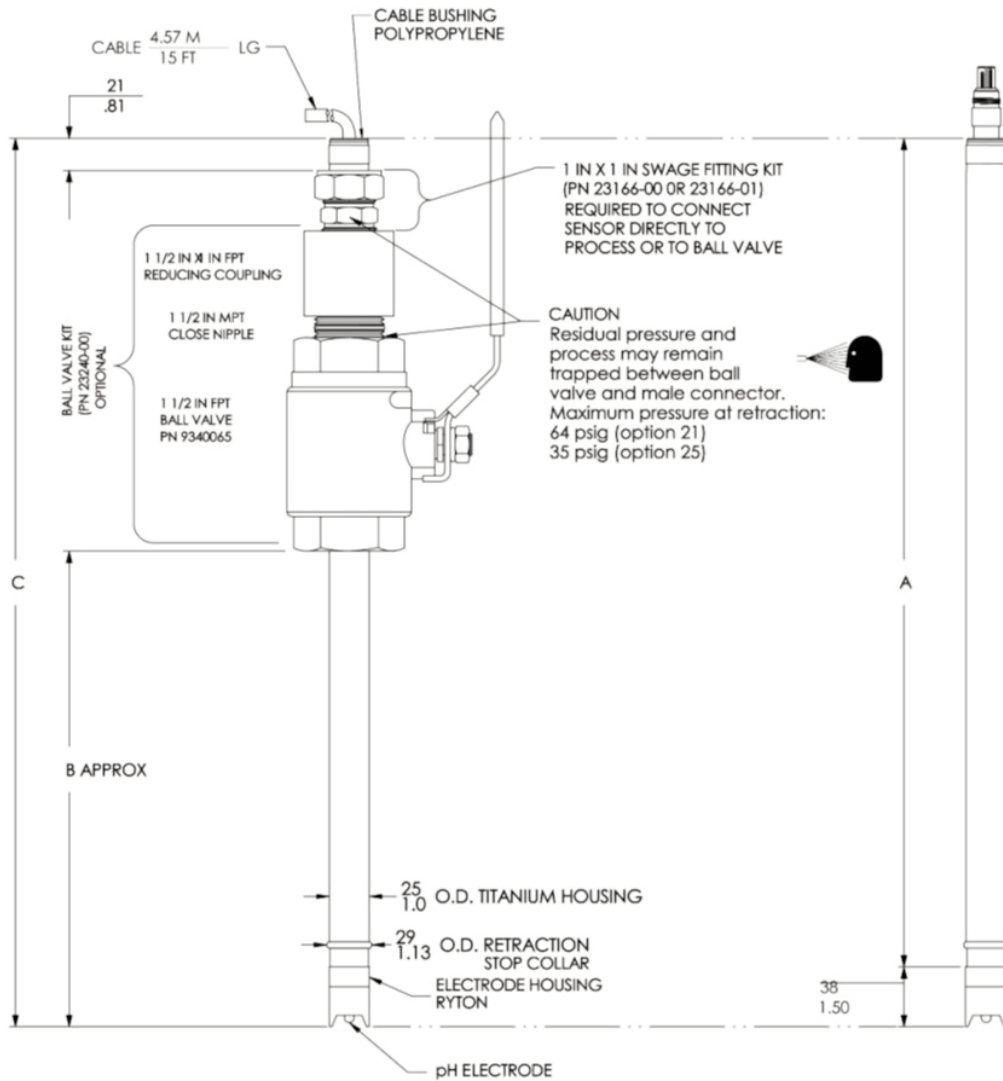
Rosemount 3400HT and 3400HTVP sensor dimensions with optional Ball Valve PN 23765-00
